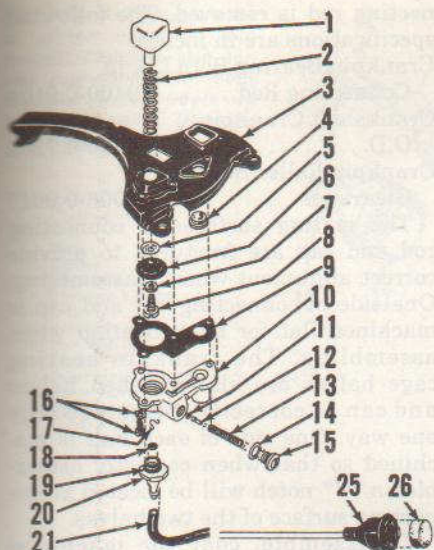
Exploded view of fuel primer pump and associated parts used on most models.
